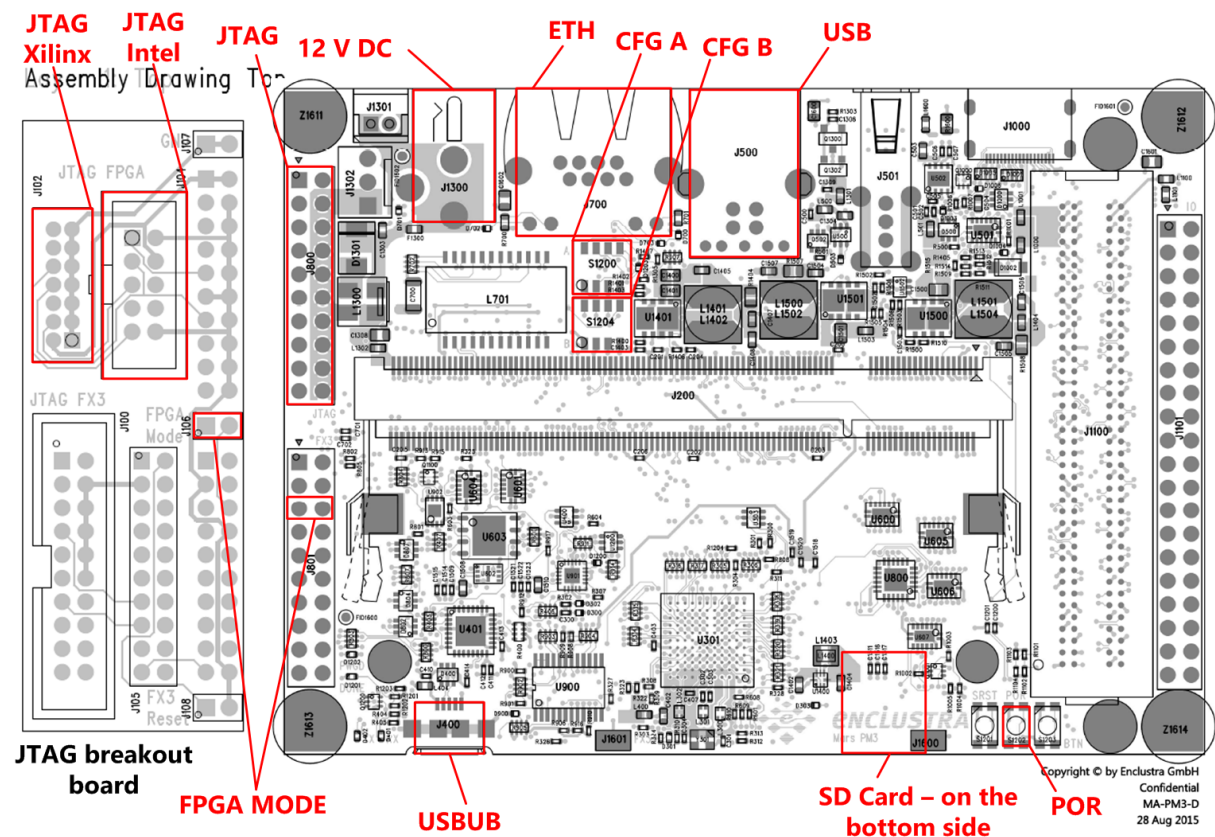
Mars PM3 Base Board Assembly Drawing (Top View)
